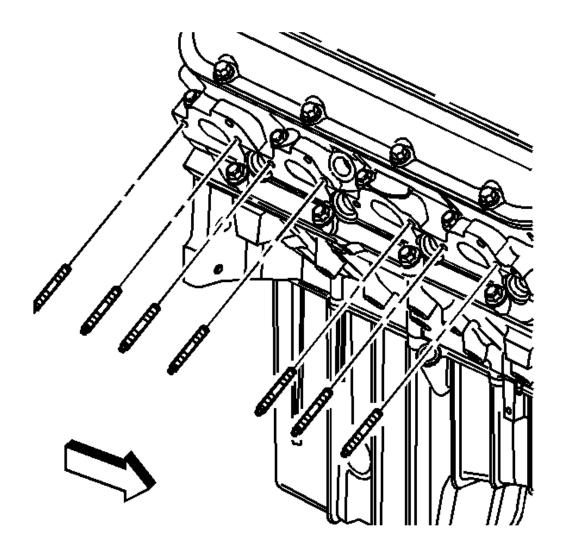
View Of Exhaust Manifold Studs Courtesy of GENERAL MOTORS CORP.
